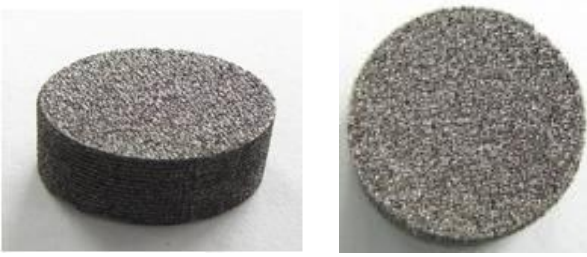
Fabricated cylindrical part made by direct laser melting process
